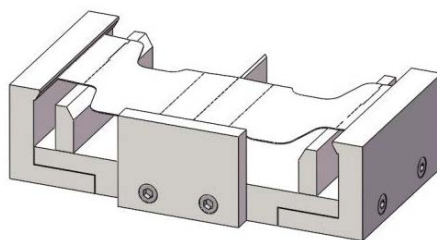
Paper forming mold for the inner frame of double inner cigarette pack
